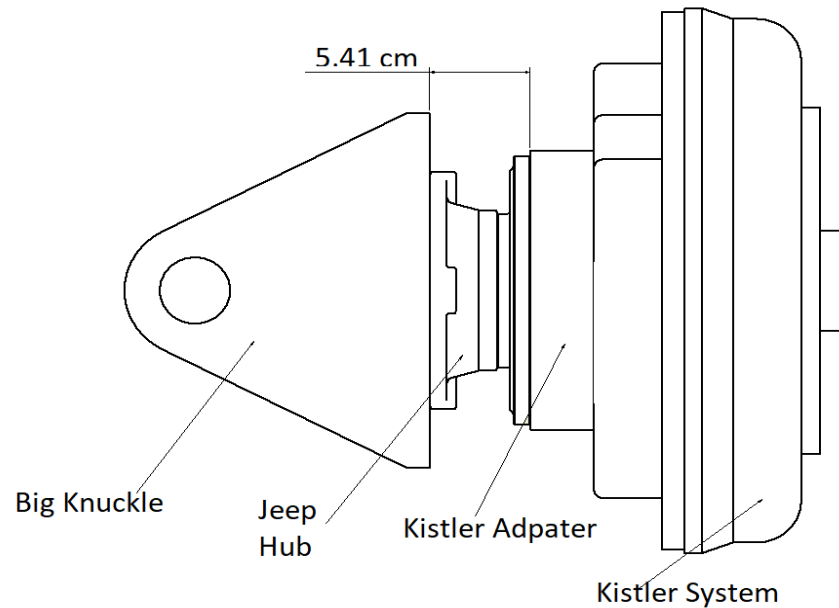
Top view : Existing assembly of the big knuckle, Jeep Hub, *Kistler* adapter and the *Kistler* system.
